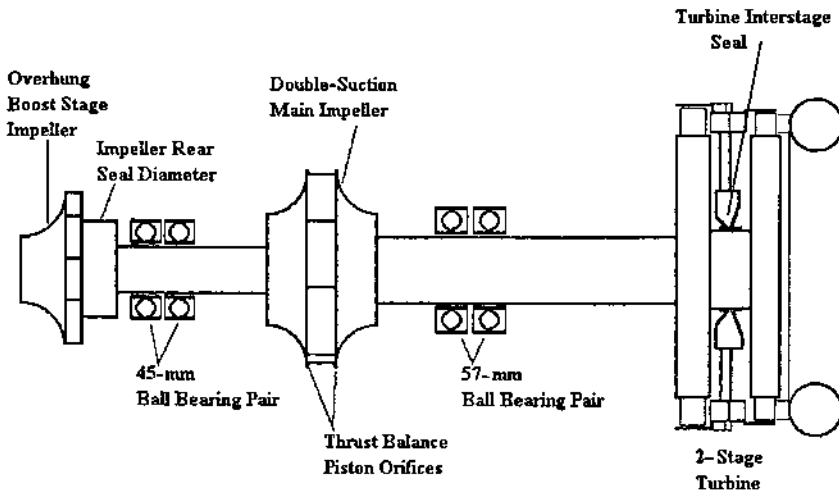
Oxidizer turbopump rotor mechanical arrangement.
